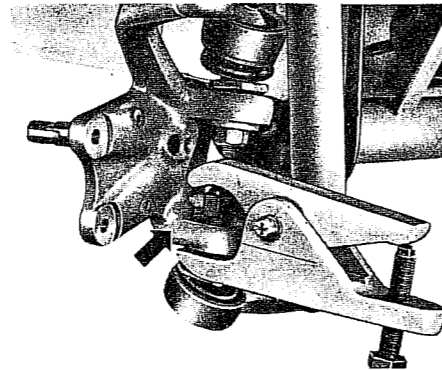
Disconnecting the lower ball joint stud from the steering knuckle. Note that the nut is left on the stud to prevent damage to the threads.
